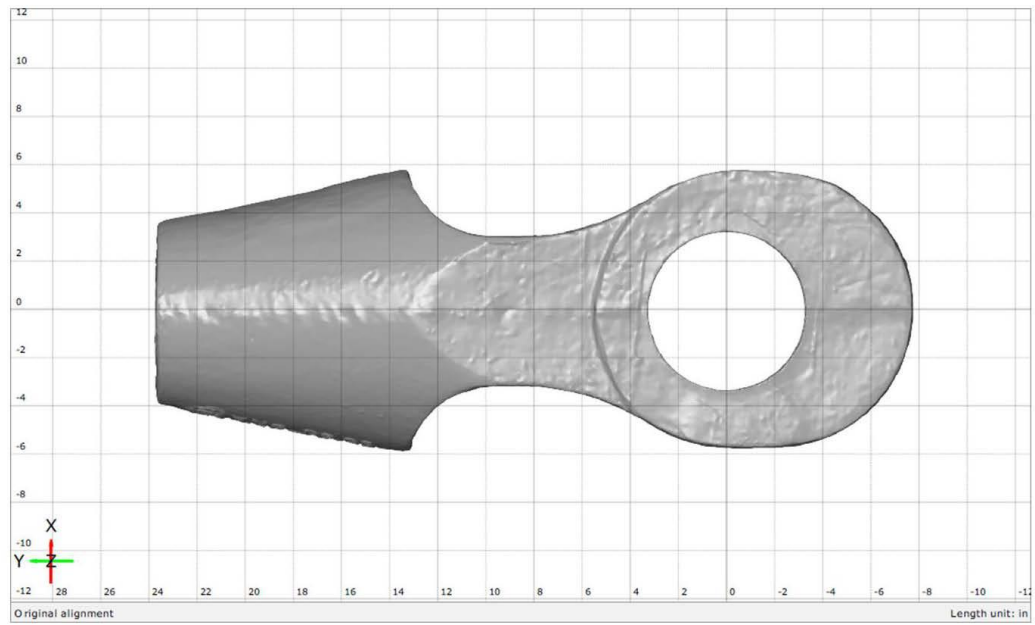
Laser scan of the as-received M4N socket, 3 o'clock side view with the top of the socket on the top side of this image.
